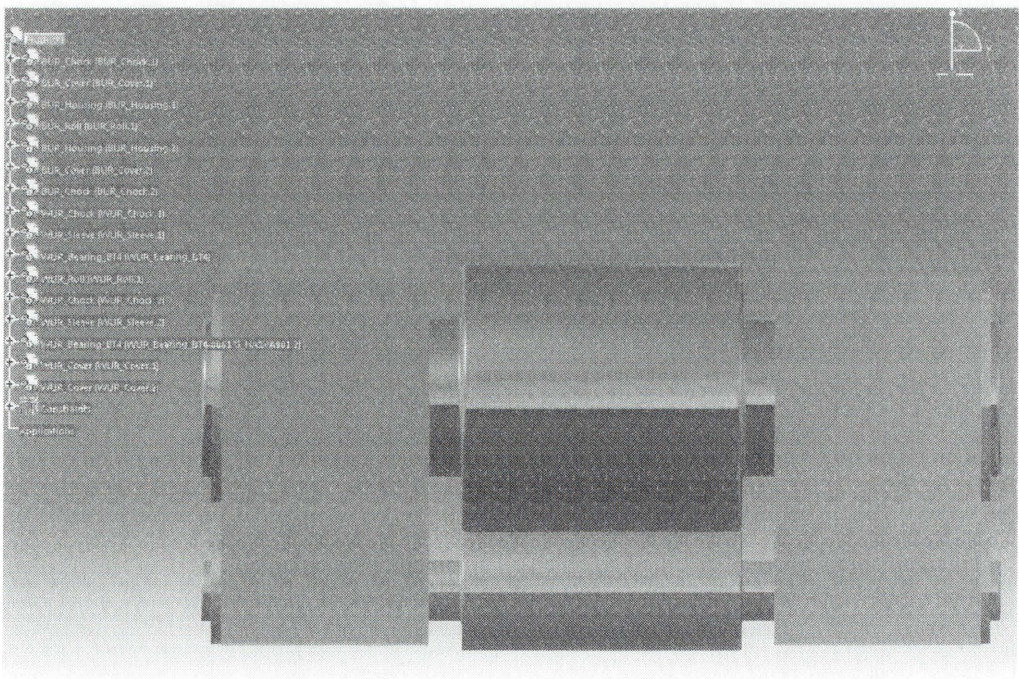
Front view of the upper rolling stand in cold rolling mill
